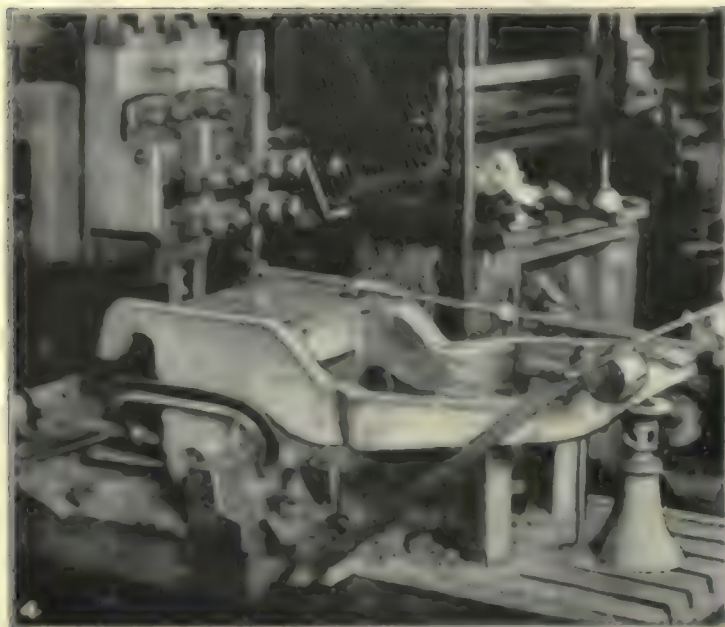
PLANING THE BED. FIG. 5—AN AIR STRAIGHTENING PRESS
